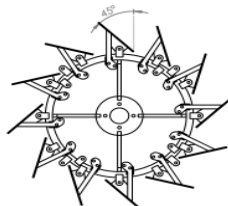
The narrow lug wheel model with 12 lugged and 45° angle
